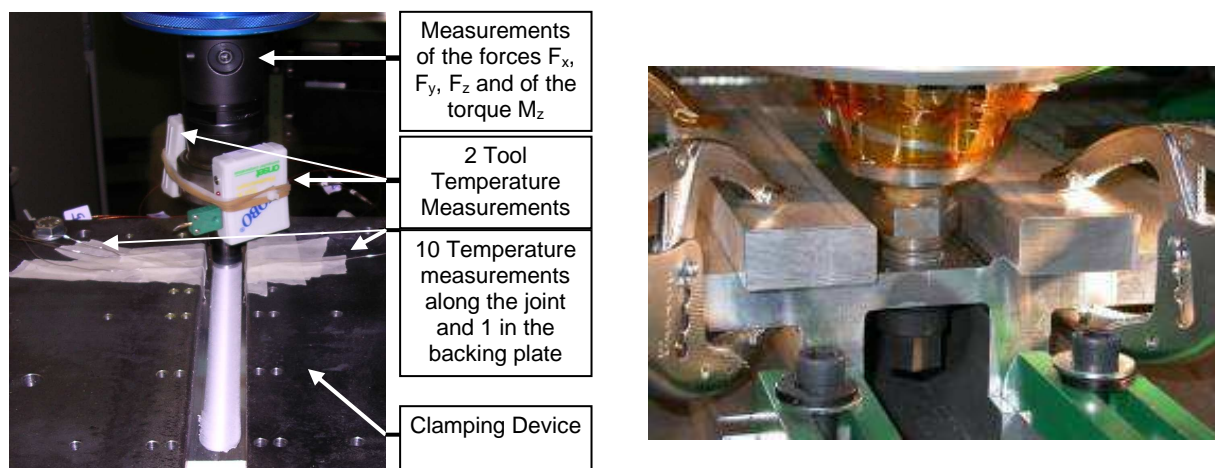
Welding equipment and weld configuration experimented at UCL (left) and EADS (right)
